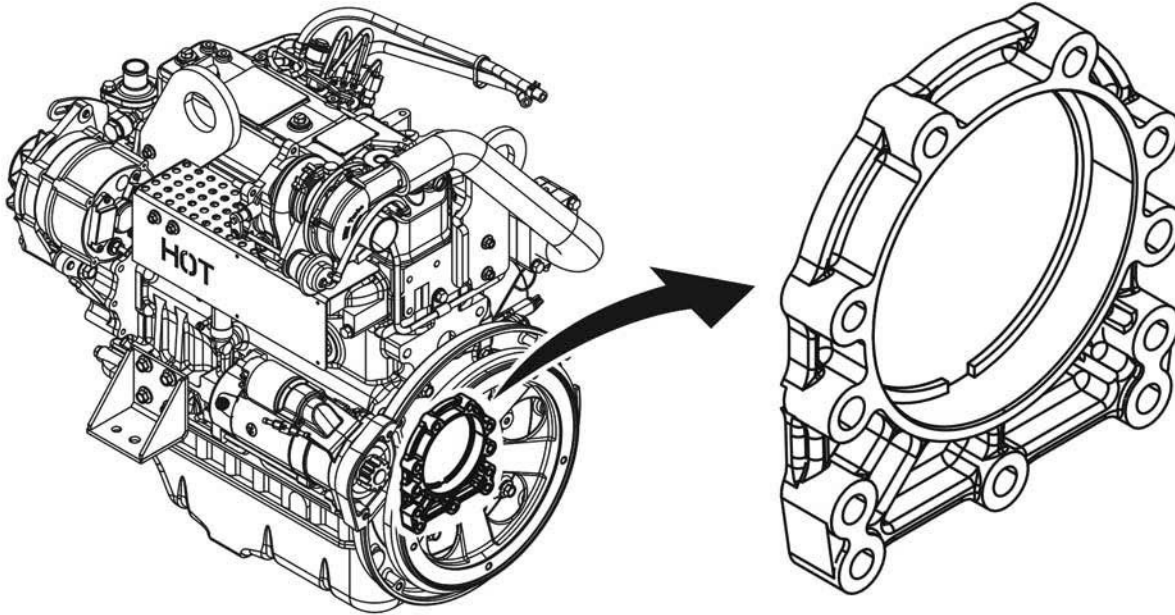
Crankcase Rear Bearing Case Cover — Location.
